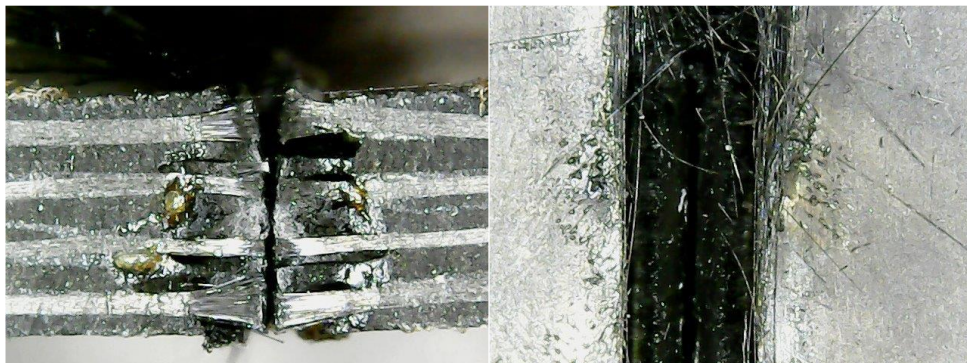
Microscope images of edge side (left) and top side (right) of laser cutting test 47.
